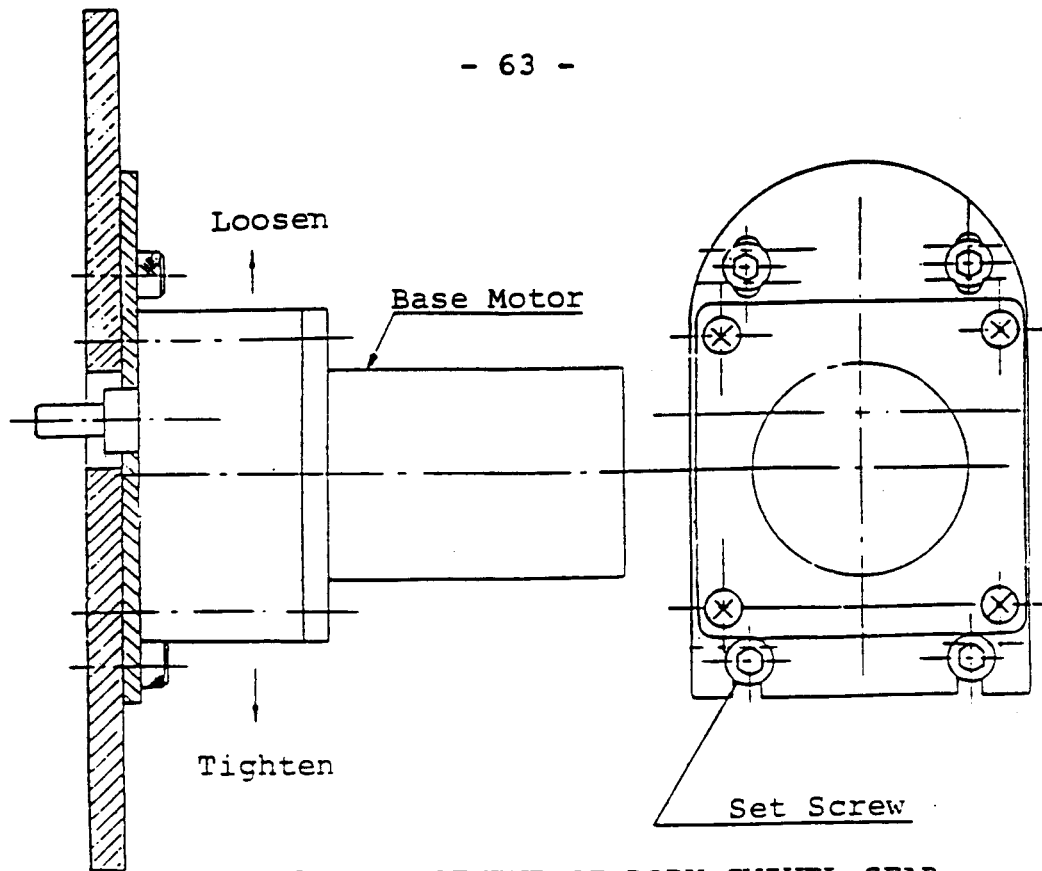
ADJUSTMENT OF BODY SWIVEL GEAR
